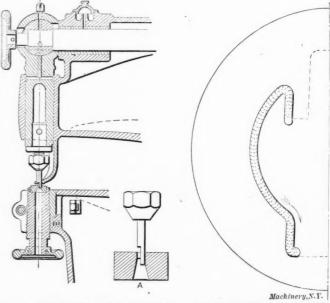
Sectional View of Reciprocating Parts and Die-holder.
